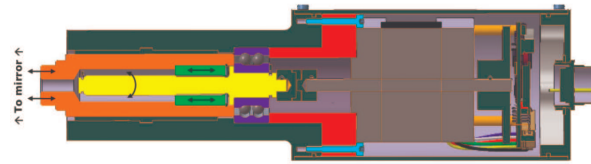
A cross sectional schematic diagram of the actuator, exposing the inner components.
